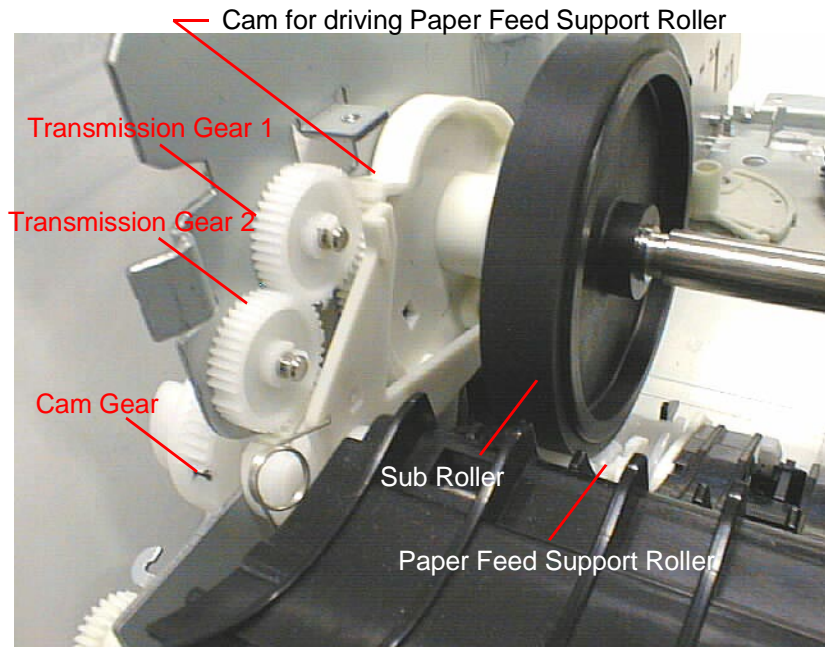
Transmitting motive power to Paper Feed Support Roller
